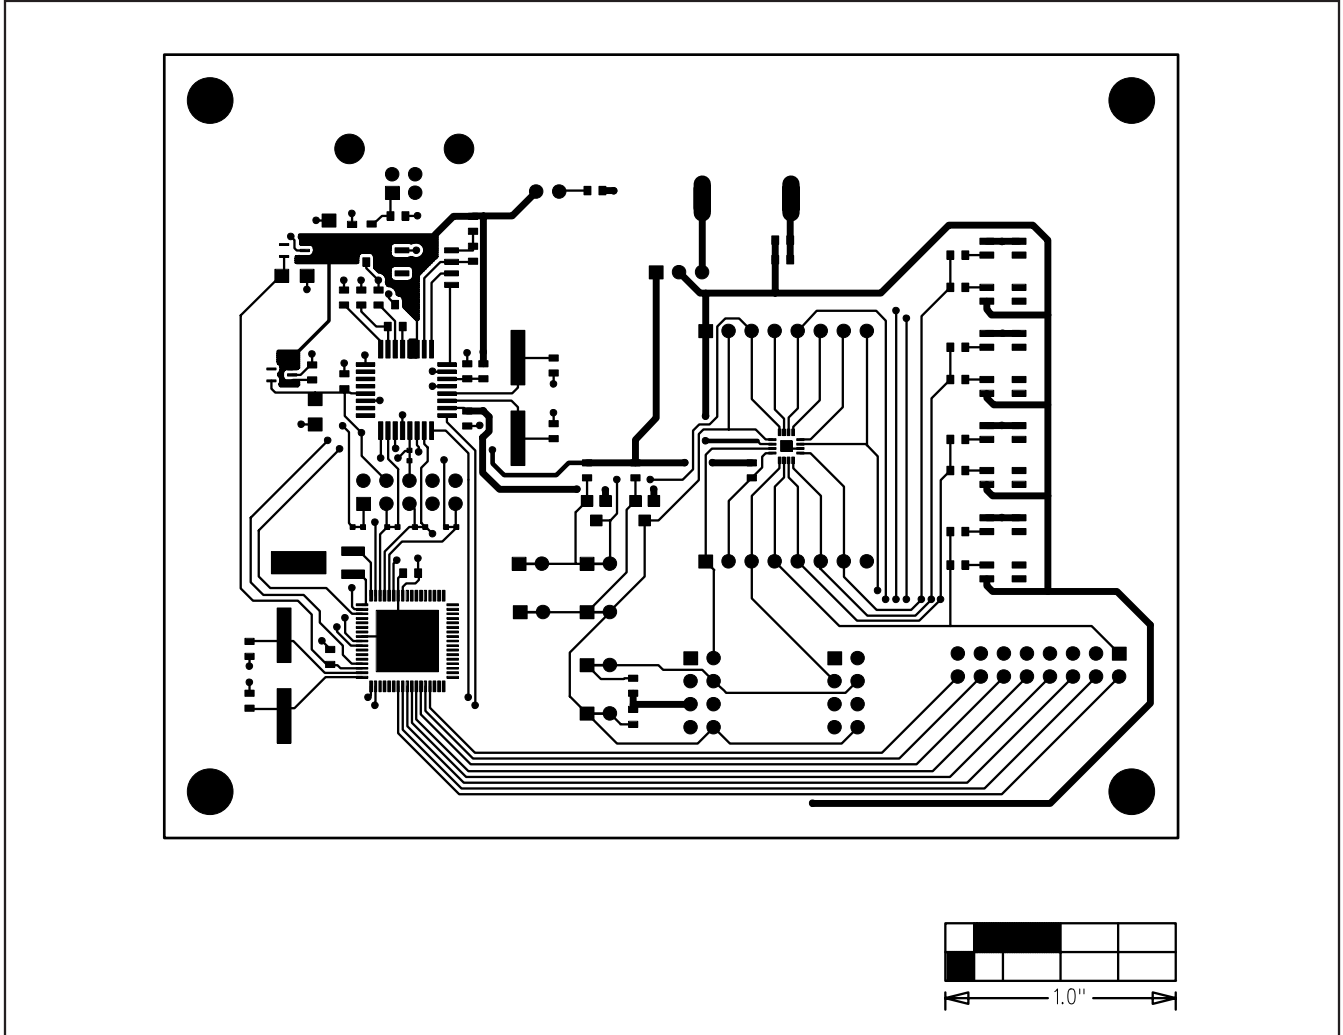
MAX7320 EV Kit PCB Layout—Component Side
